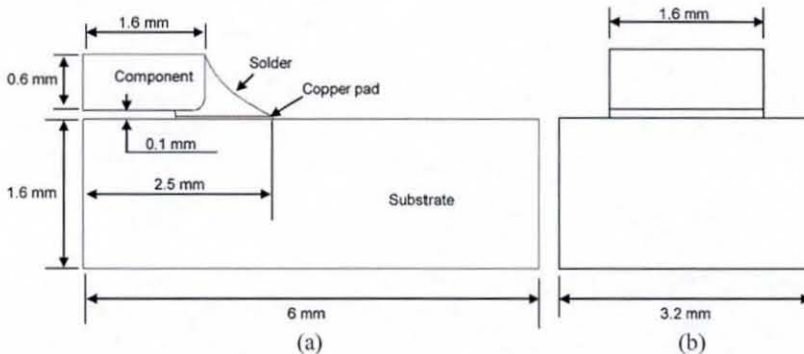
Geometrical details of chip resistor assembly: (a) side view and (b) front view.
